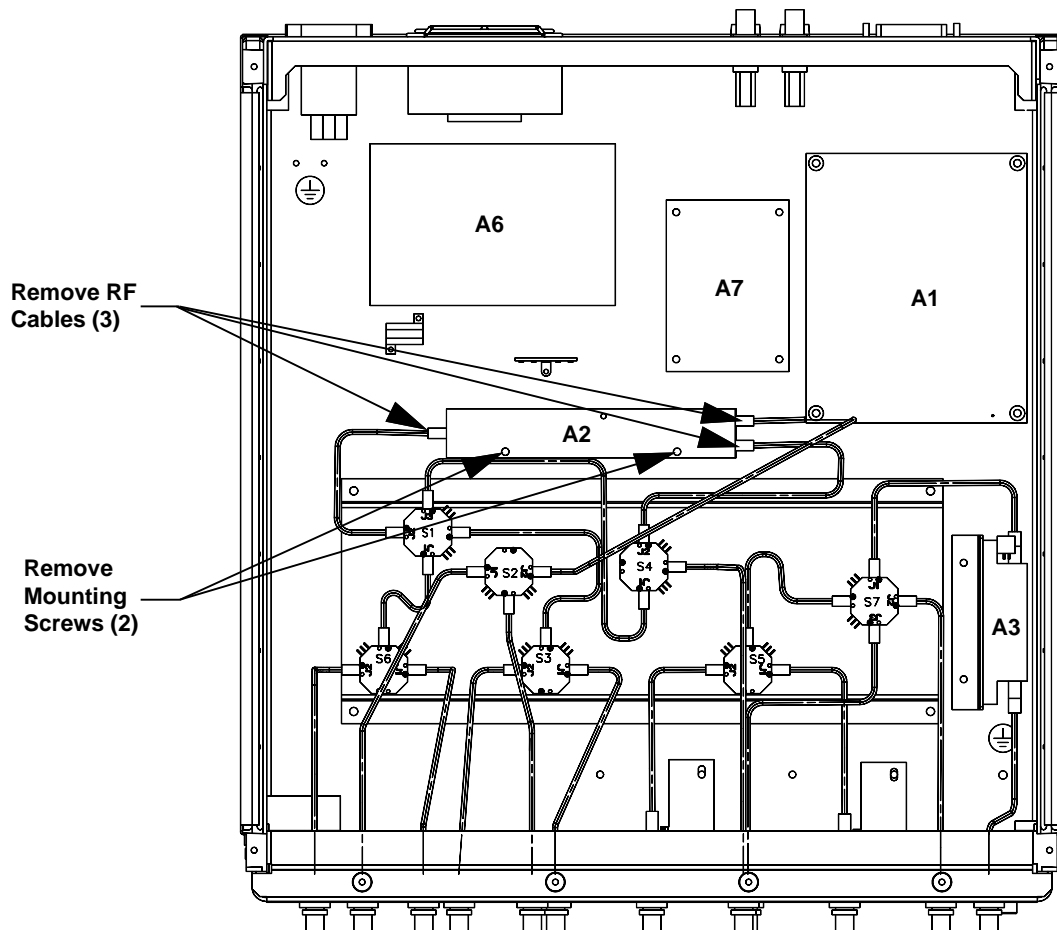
A1 GPIB Parallel Interface PCB Removal
